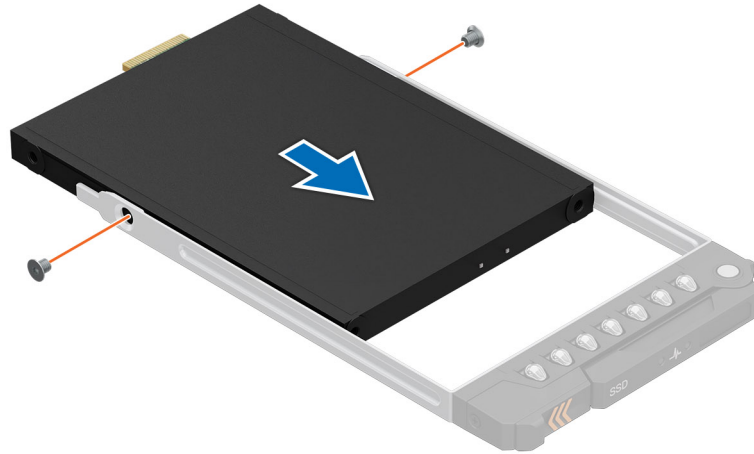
Installing an EDSFF E3.S drive into the drive carrier
